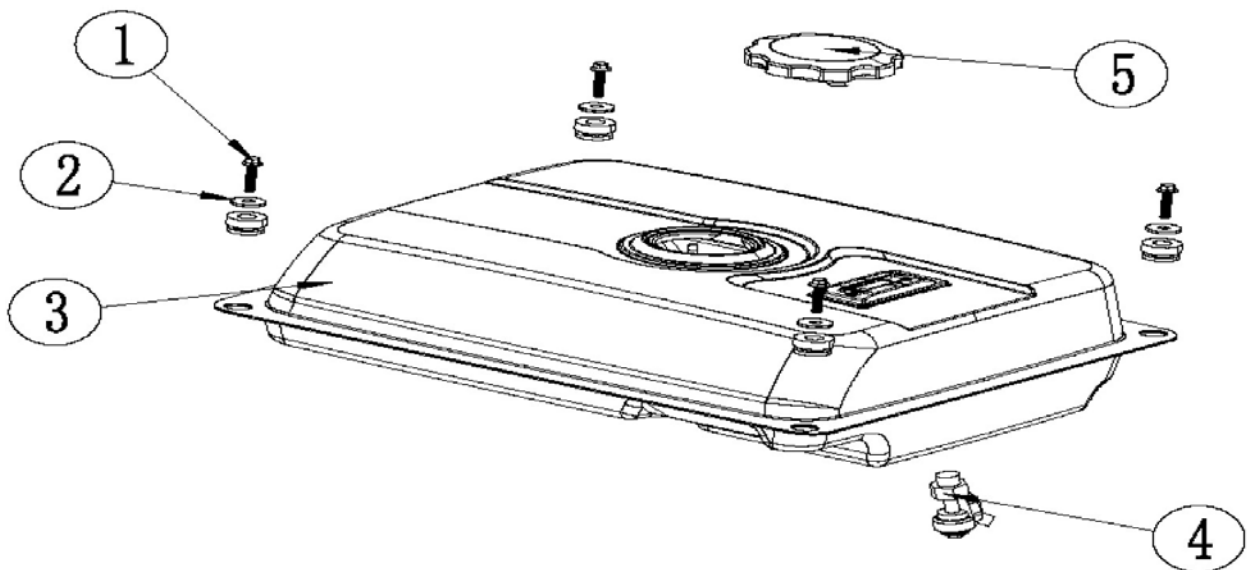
Spare parts drawing 2 PG-I 42 SE
